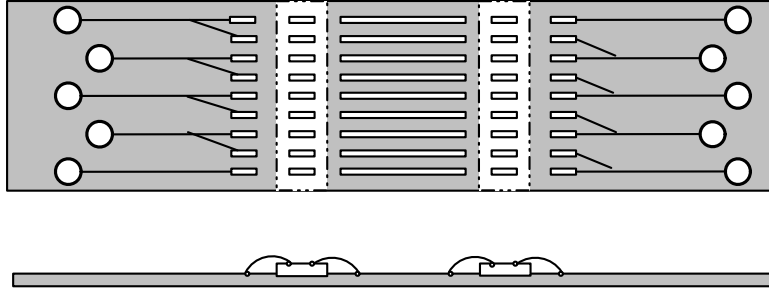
Top: Top view of test board. Bottom: Side view of test board. Actual dimension of board 5mm X 40mm
